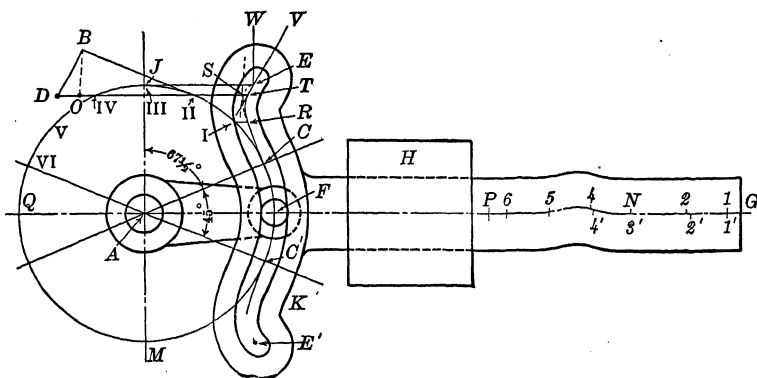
CAM SURFACE ON RECIPROCATING FOLLOWER ROD
